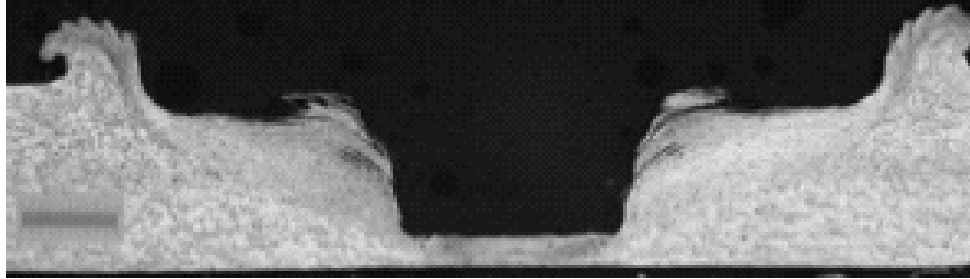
Vertical cross section of FSSW weld specimen for cylindrical pin (Badarinarayan et al., 2007)
